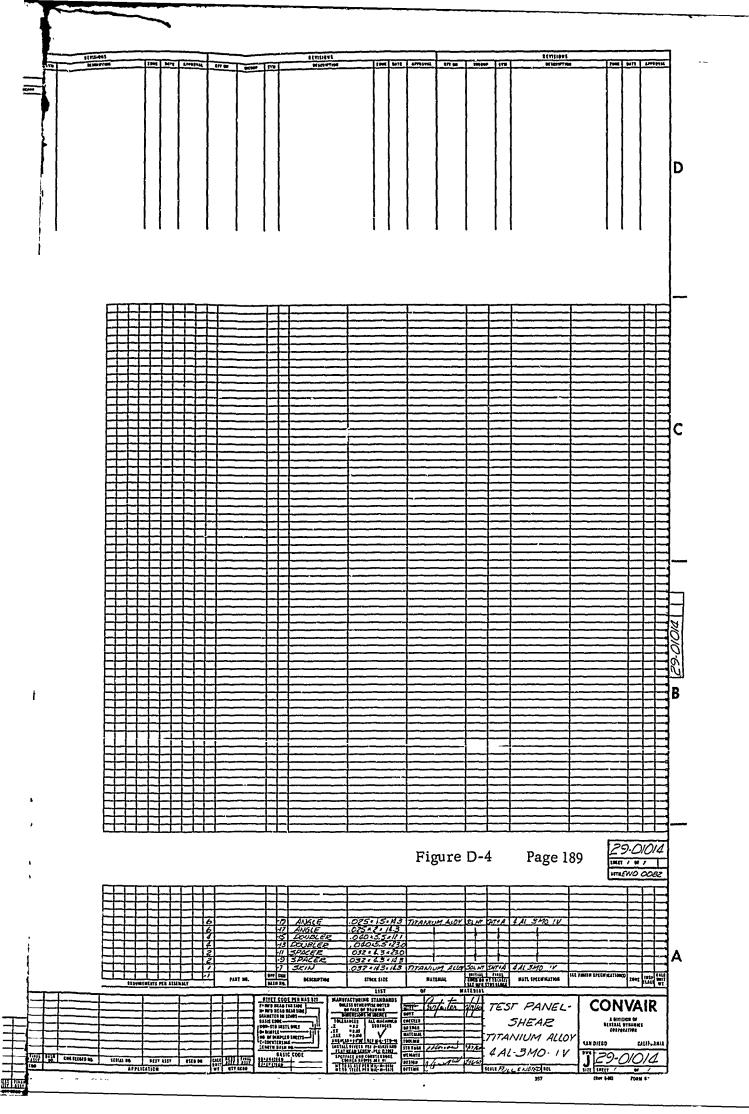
SHEAR TEST PANEL - Engineering Drawing 29-01014
